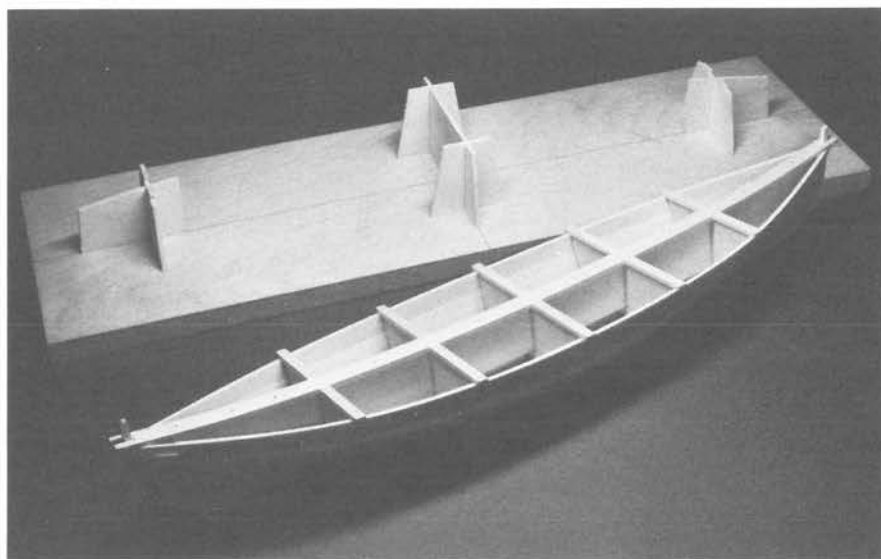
The planking shell (still on the mold) removed from the construction board.
